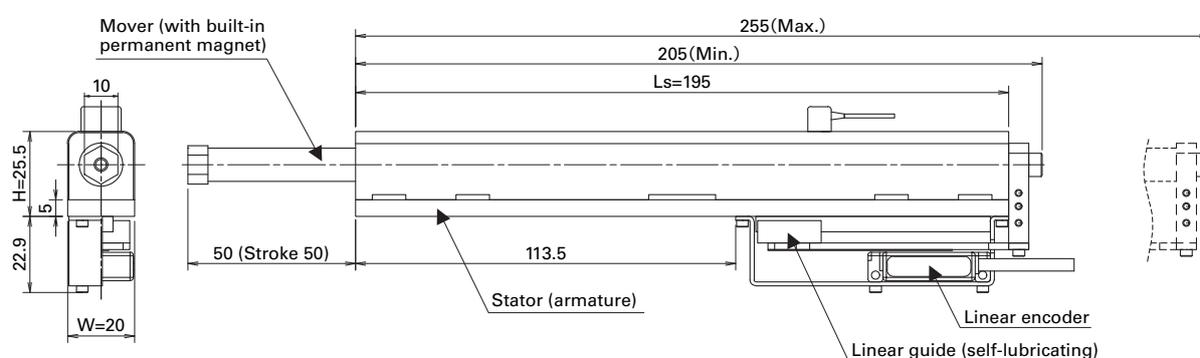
Composition and dimensions of the 20 mm wide compact cylinder linear servo motor
